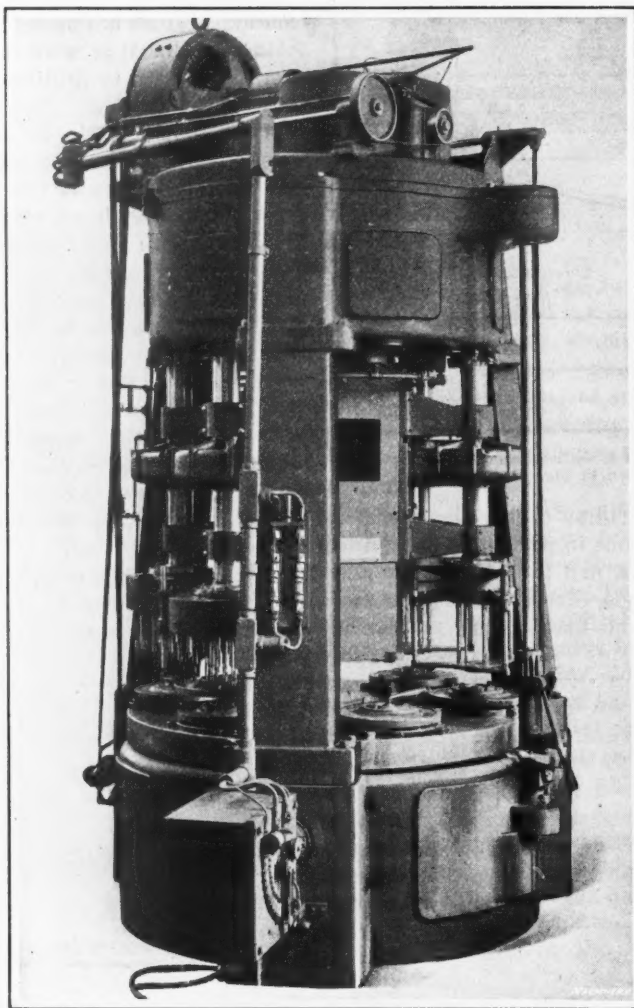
Baush Station Type Multiple-spindle Drilling Machine built for performing Eighty-one Drilling, Counterboring and Reaming Operations on Ford Flywheels
